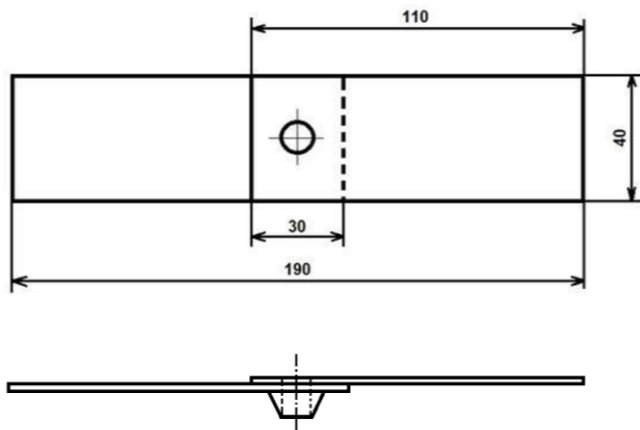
Shape and dimensions of test specimens and joint for the tool Ø5.3 mm.
